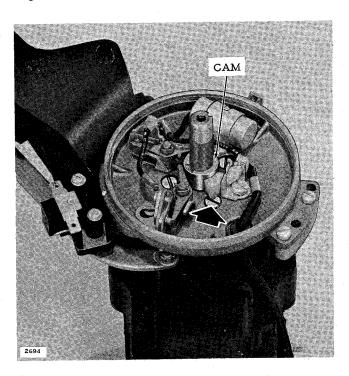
Magneto Cam and Breaker Plate Attaching Screws
